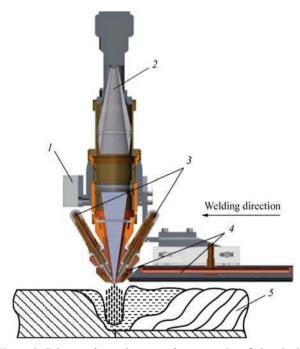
Scheme of experiment performance; 1 — fixing the integrated plasmatron to the robot arm; 2 — supplying laser radiation; 3 — cathode assemblies; 4 — gas shielding; 5 — sample being welded
